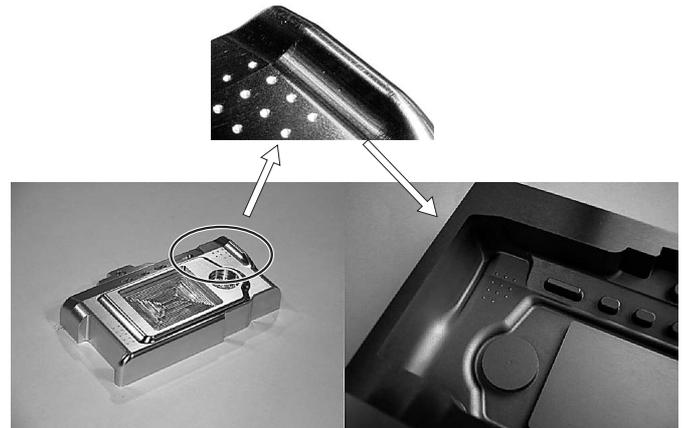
Digital camera copper electrode and machined surface after electrospark machining
